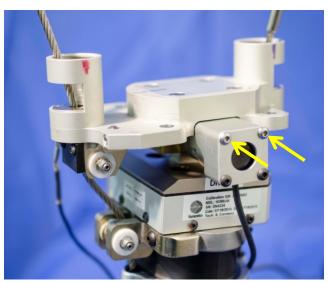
Attach rotary potentiometer housing to head neck mounting platform
